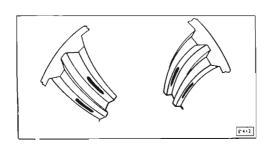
Correct contact markings on sides of bevel wheel teeth under "hand load" only
